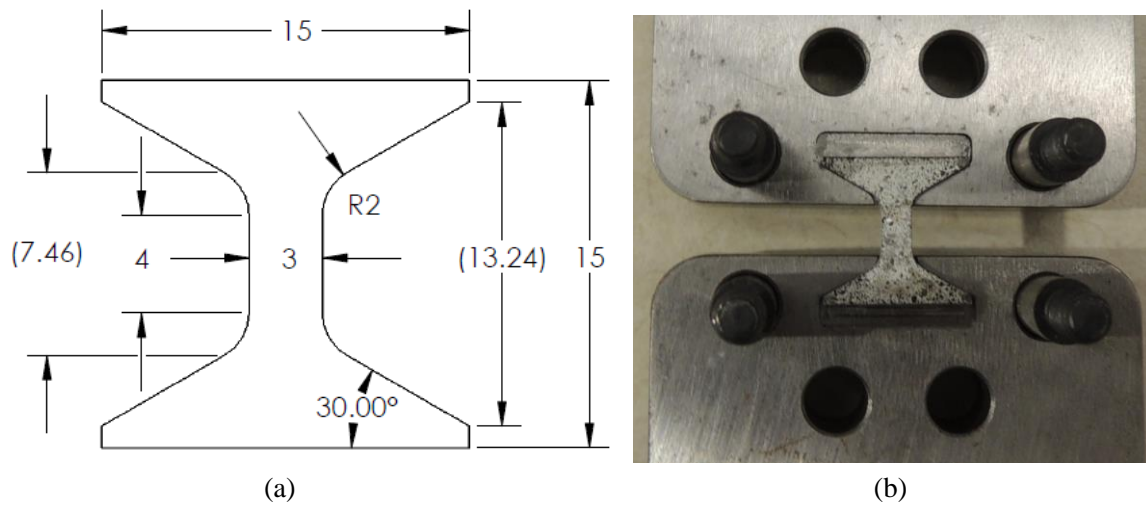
(a) Geometry of a reduced-size dogbone specimen (unit: mm) (b) half-assembled fixture showing grooves
